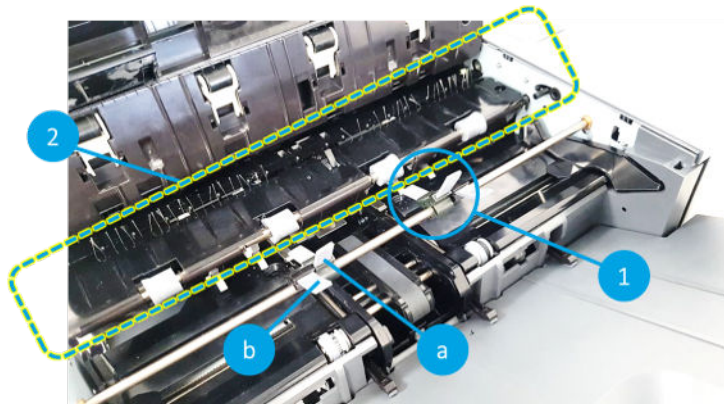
Inner finisher system - paddle unit driving system detail view (2/2)
